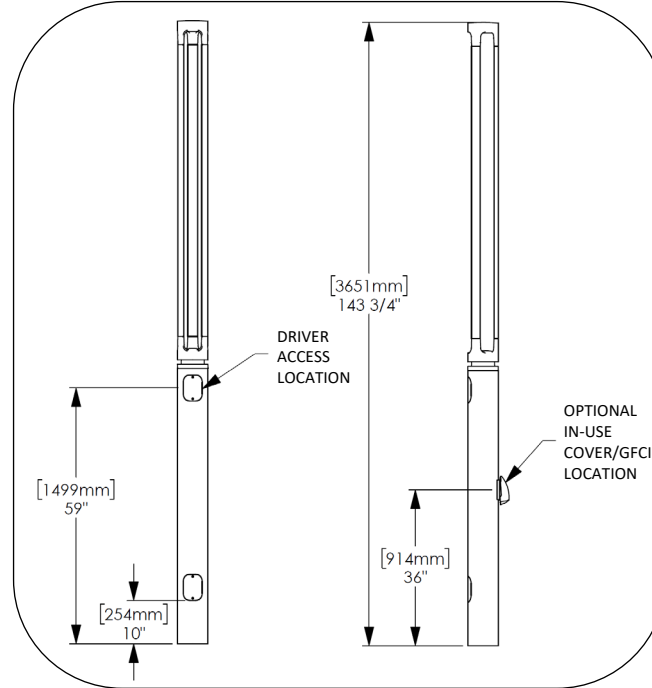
COLUMN LIGHT 12FT HANDHOLES
